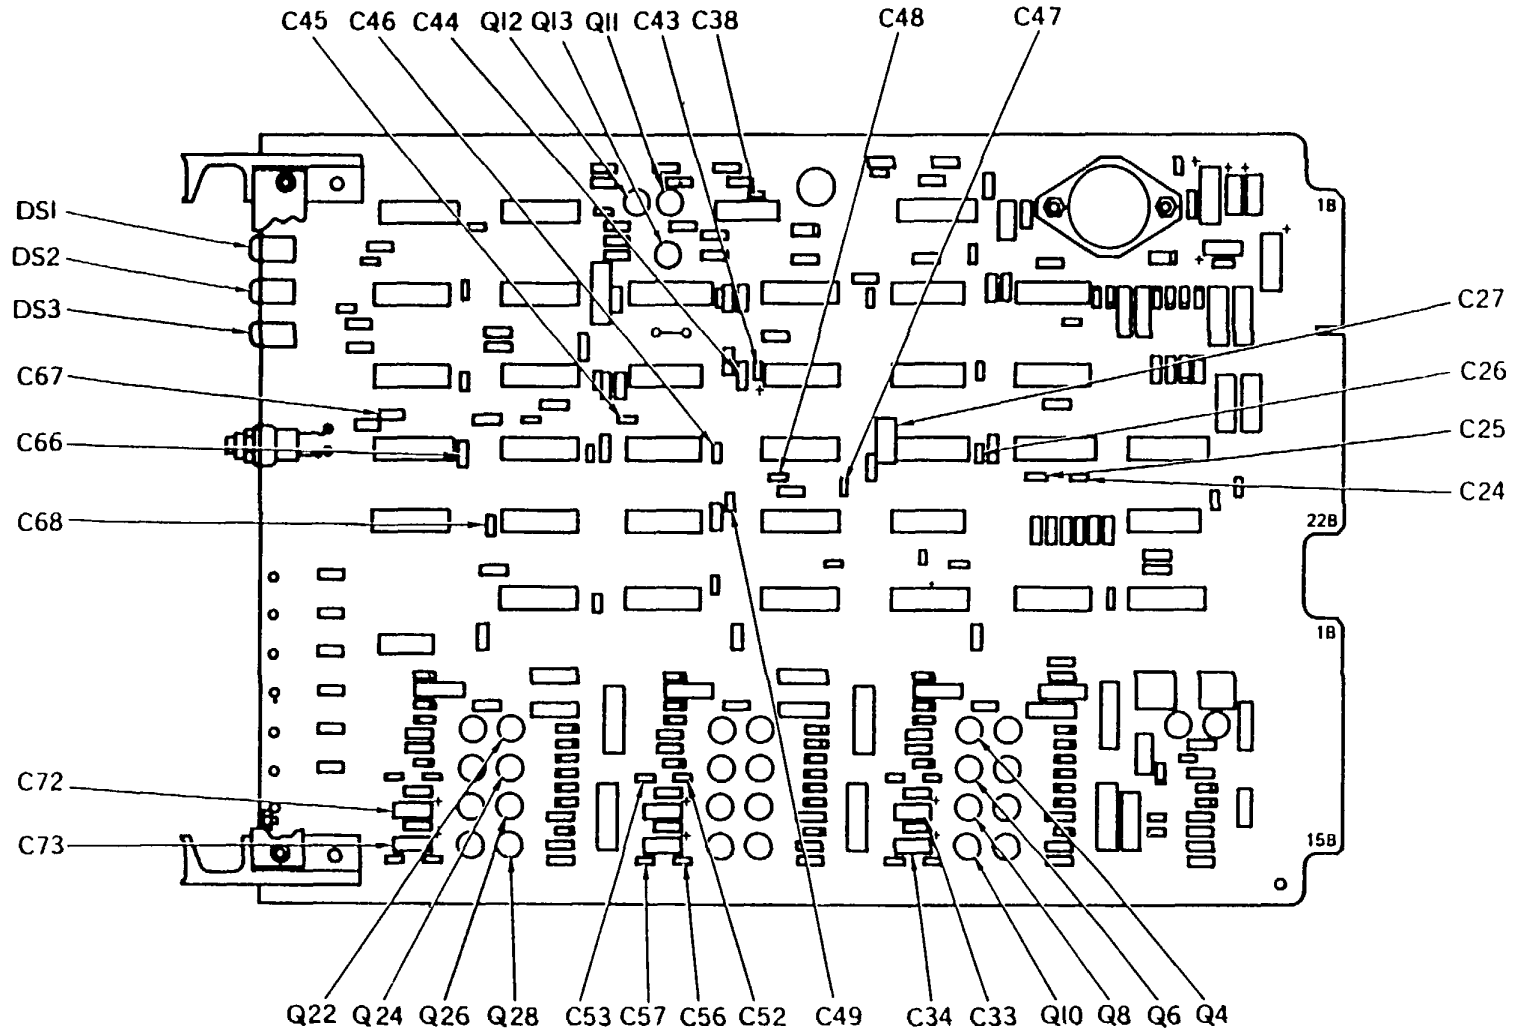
DRIVER unit parts location diagram (sheet 14 of 14) DVR04.
